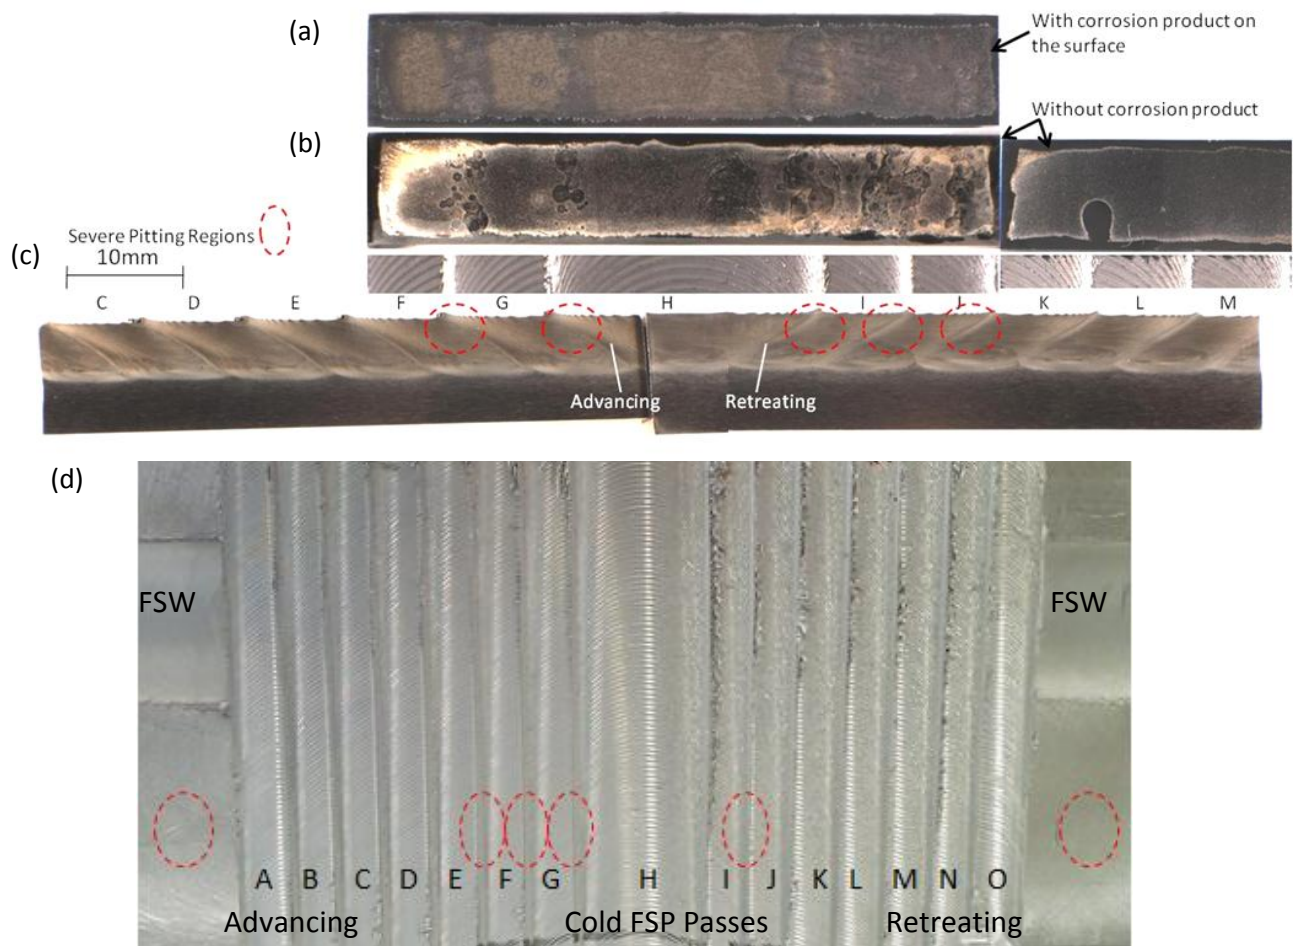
Series of optical macrographs showing cold FSP specimens following 10 day, 0.1 M NaCl immersion testing, with (a) the corrosion product on the surface, (b) the corrosion product removed, (c) the cross-section and plan view of the relative FSP passes with the locations of severe pitting attack, and (d) the plan view of the entire series of cold FSP passes with the locations of severe pitting attack
